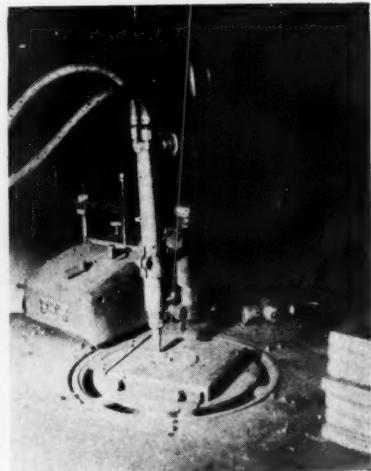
FLAME CUTTING of center hole is accomplished by a turntable fitted with a jig. Cutting machine is stationary. Flame burns continuously affecting a considerable saving in oxygen used.
